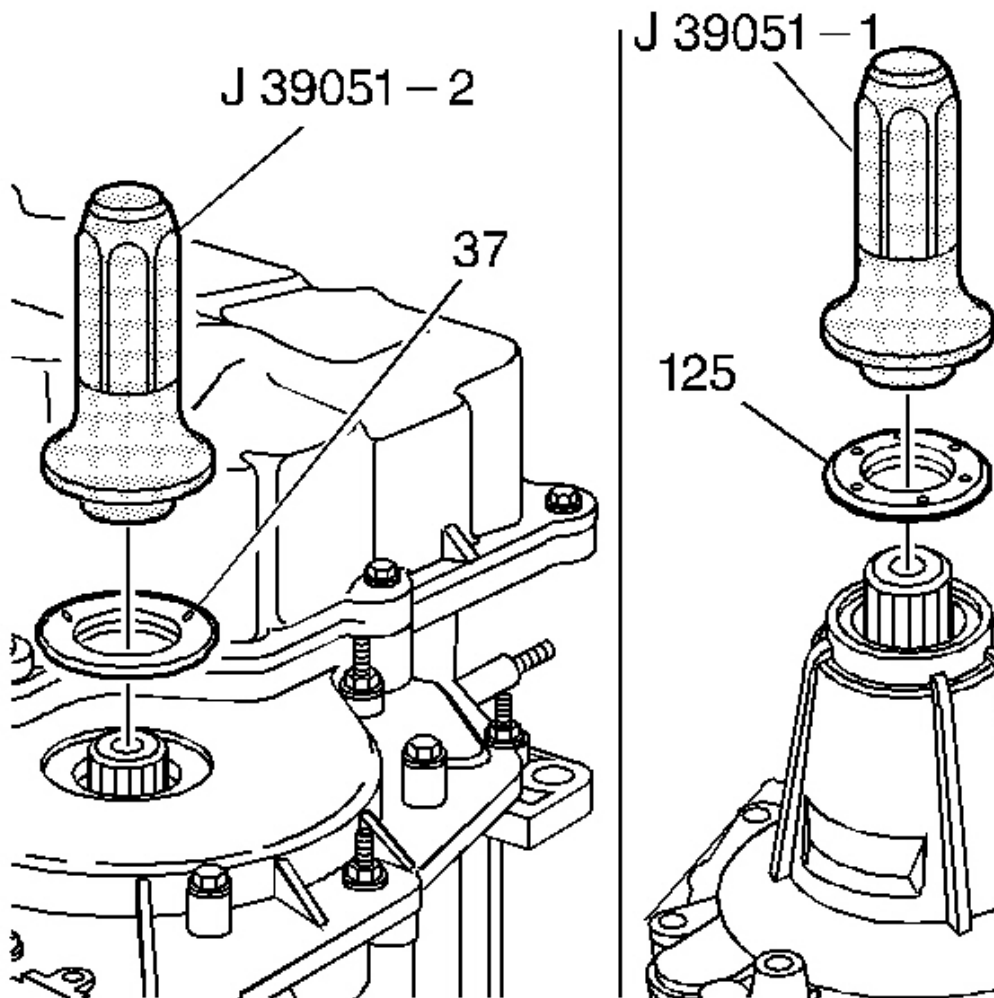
Installing Axle Seals With J 39051-1 & J 39051-2
